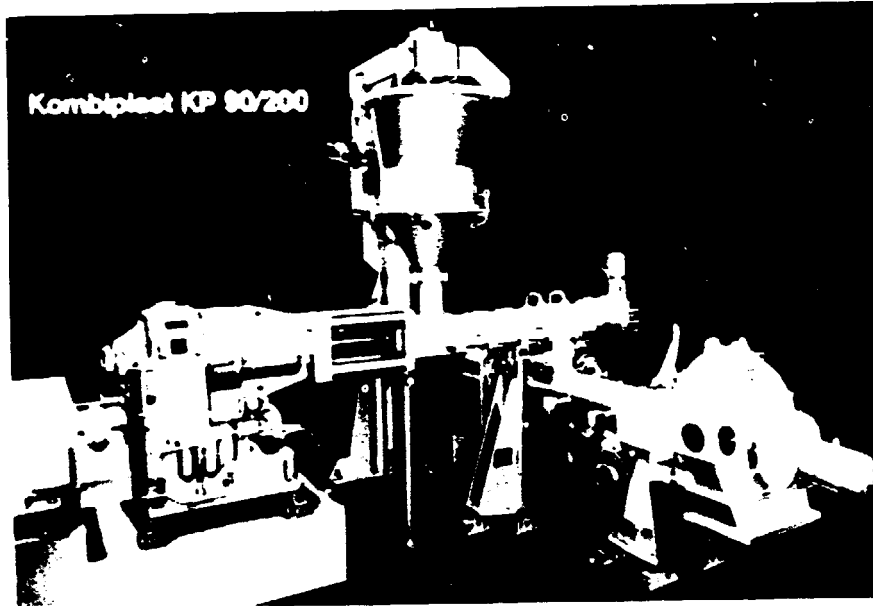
Twin-screw kneader (ZSK) with output extruder, by Werner & Pfleiderer
